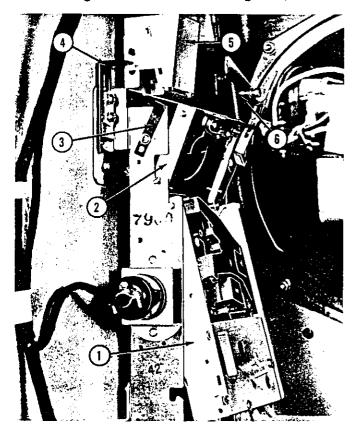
REMOVAL OF SLUG REJECTOR COMPONENTS
